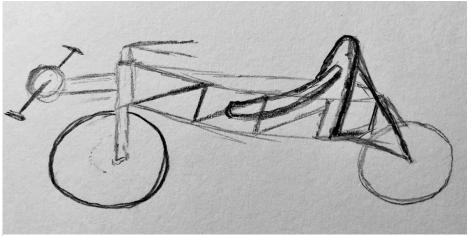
Design sketch of frame with roll hoop and limited bottom bracing.
